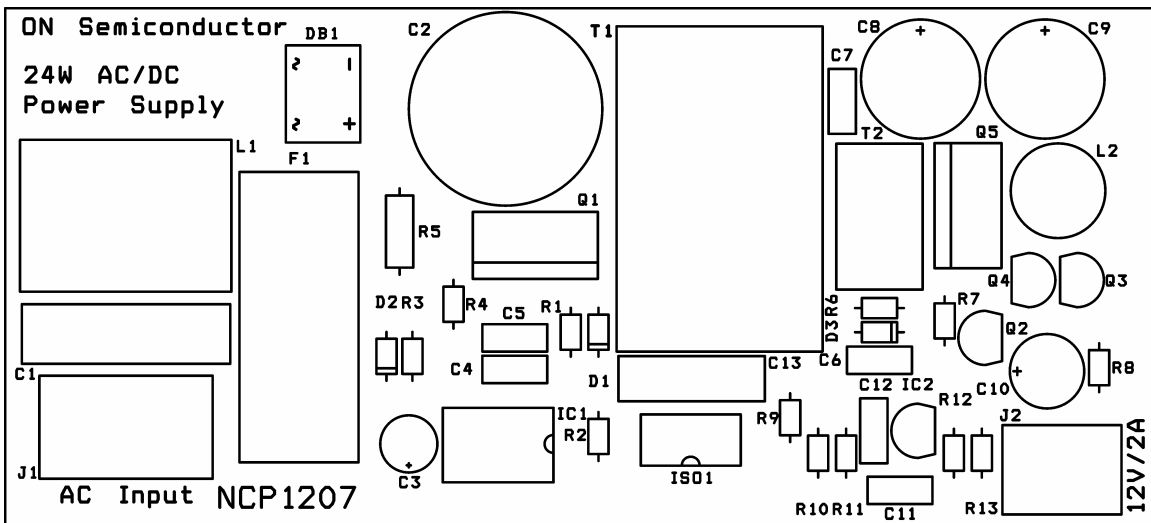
Printed Circuit Board Layout - Silkscreen Component Side
